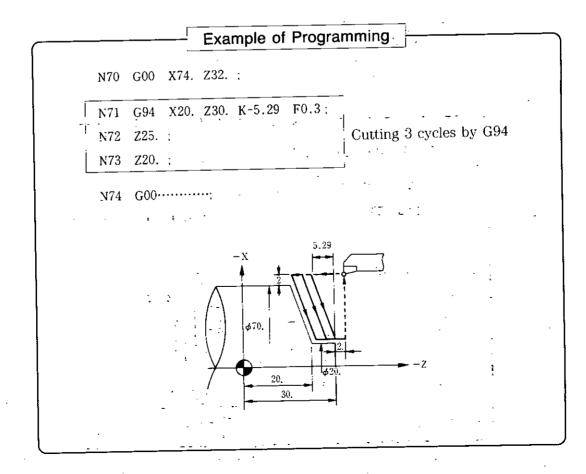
Taper Front Thread Cutting Cycle
